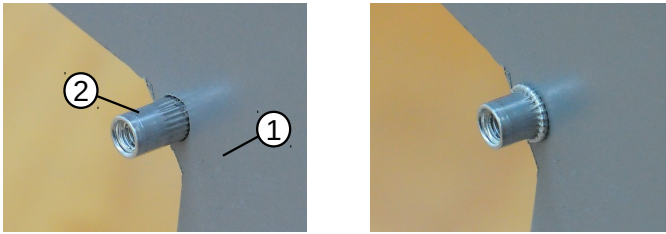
Example of rivnuts inserts. Left: a rivnut before compressing. Right: a compressed rivnut. ① – instrument panel, ② – rivnut.
